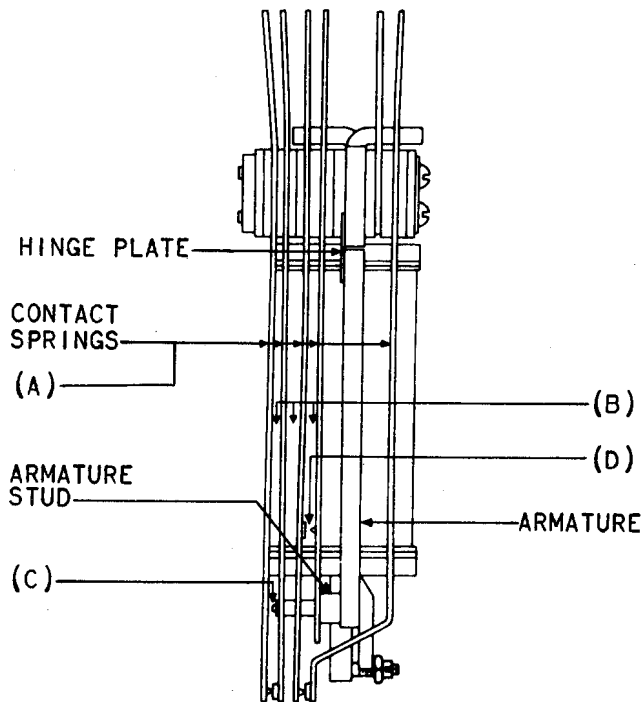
Flat Spring Relay (E-Type Illustrated)
